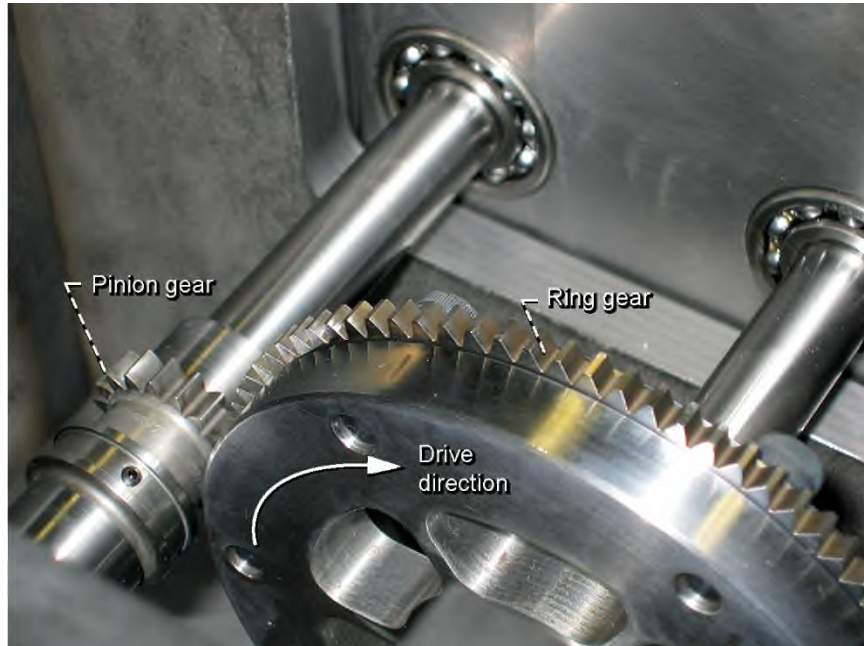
Pre-test photo of ring and pinion gears installed in the test gearbox for side-1, build-1.
